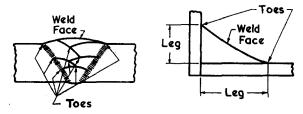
Examples of Weld Faces, Toes and Legs
